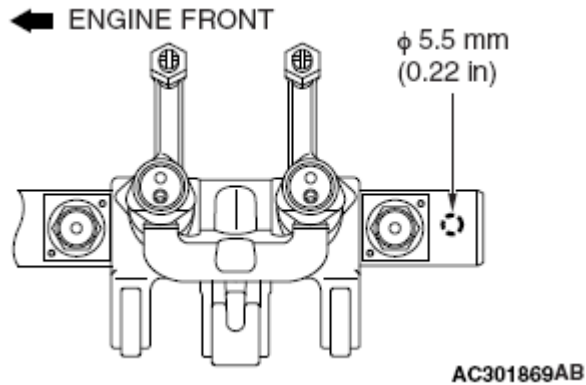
Intake Rocker Arm And Shaft Assembly Installation Direction
